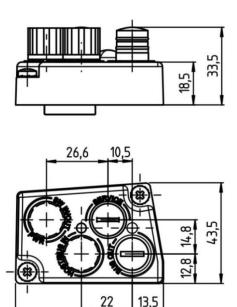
Dimension drawing BE 901 PB with BE 901 MK PB connection hood (all dimensions in mm)
